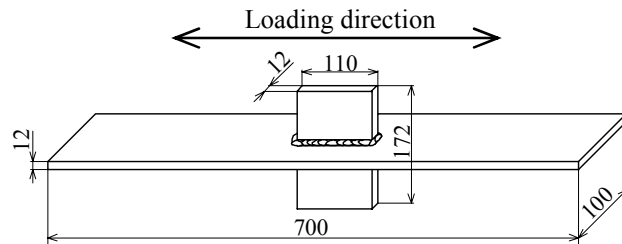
Configuration of web-gusset welded joints. (unit: mm)
